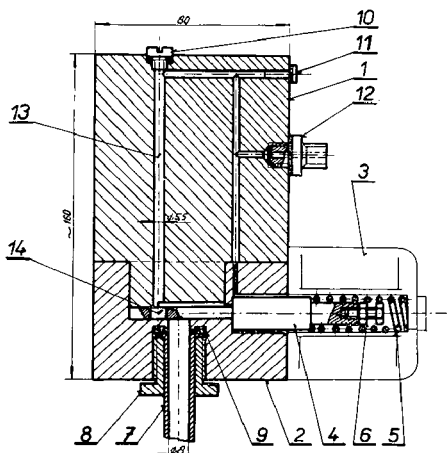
Automatic magazine. 1, 2 = body made from polymethylmethacrylate; 3 = solenoid; 4 = iron core; 5 = spring; 6 = adjusting screw; 7 = sample outlet tube for connection to pyrolyser; 8 = gland nut; 9 = PVC packing; 10 = metal screw with packing; 11 = blanked-off opening; 12 = carrier gas inlet; 13 = hollow tube for holding sample cylinders; 14 = hole in feeder rod.
